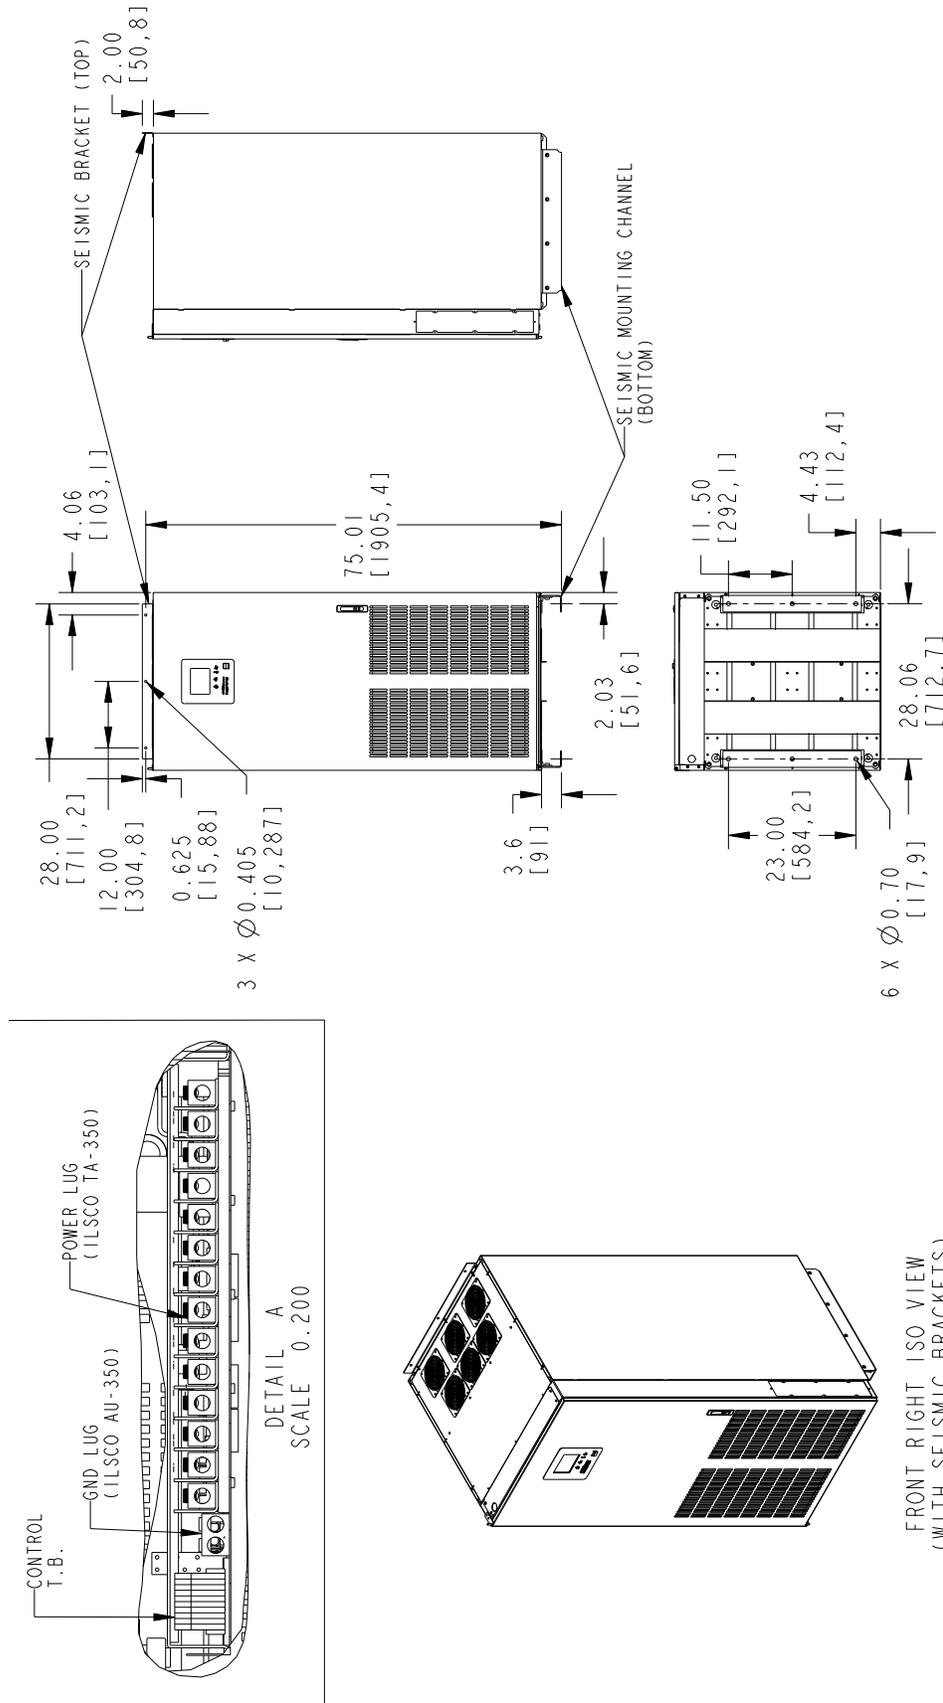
4400 50 KVA PHYSICAL DIMENSIONS (2/2)
